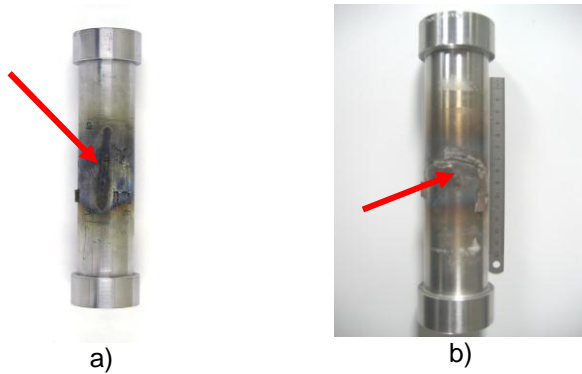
Failed component a) TFR1 with axial crack b) TFR2 with circumferential crack
